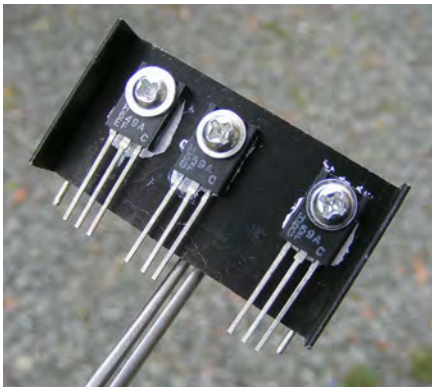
The driver transistors and bias transistor are mounted on a special small heatsink, which will be soldered to the PCB.
